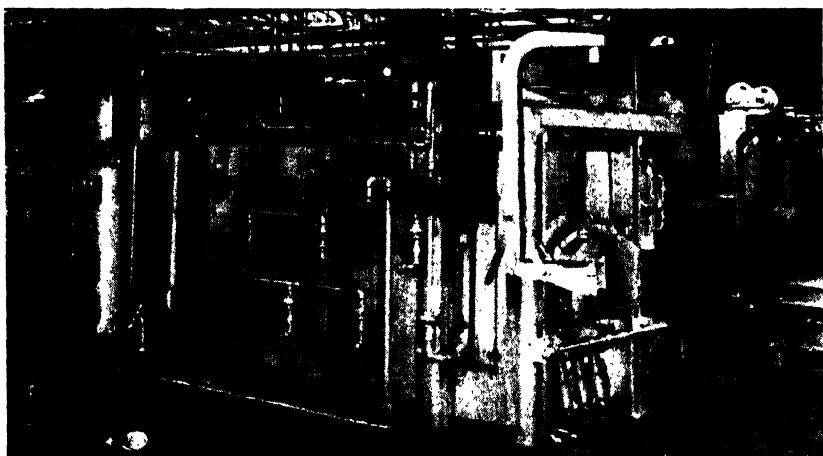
Batch type gas-fired gas-carburizing furnace at Packard Motor Car Company. The gas flames heat a muffle. The work is loaded on trays. The trays are pushed through the furnace, progressively passing through three different temperature zones. Gas locks are used to prevent loss of carburizing gas. The carburizing gas is prepared in the equipment at the left. (Courtesy Surface Combustion Co.)
